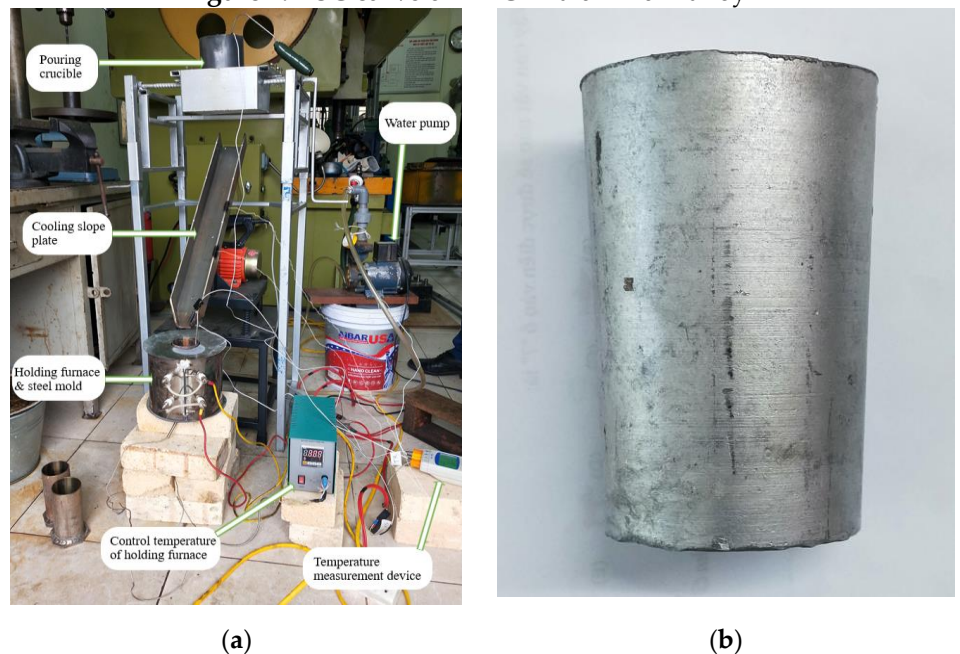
Schemes of cooling slope casting: (a) Schematic diagram of cooling slope casting; (b) Billet after casting.
